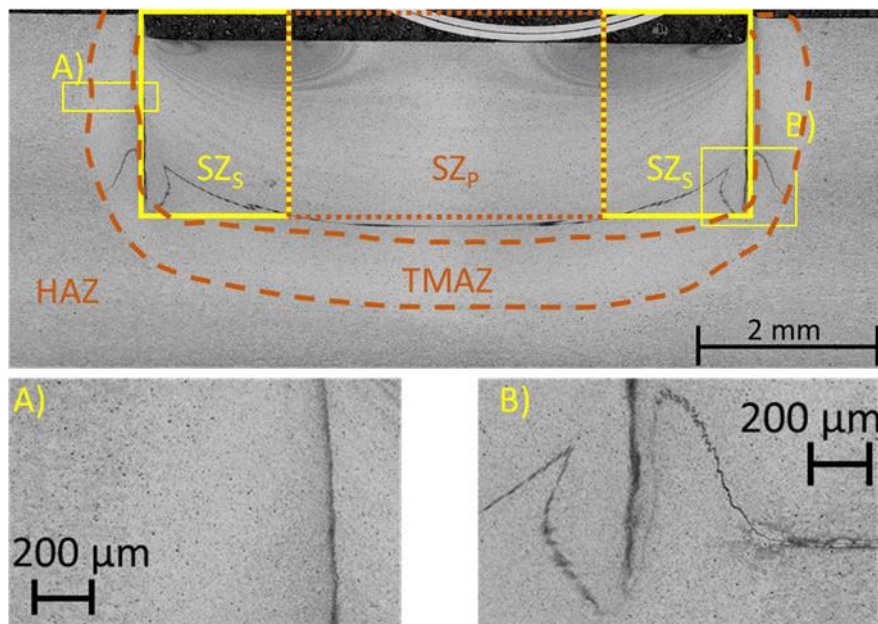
Cross-section of RFSSW AA5754-H24 welding condition W12 (RS = 1000 rev/min; PD = 2.2 mm):
